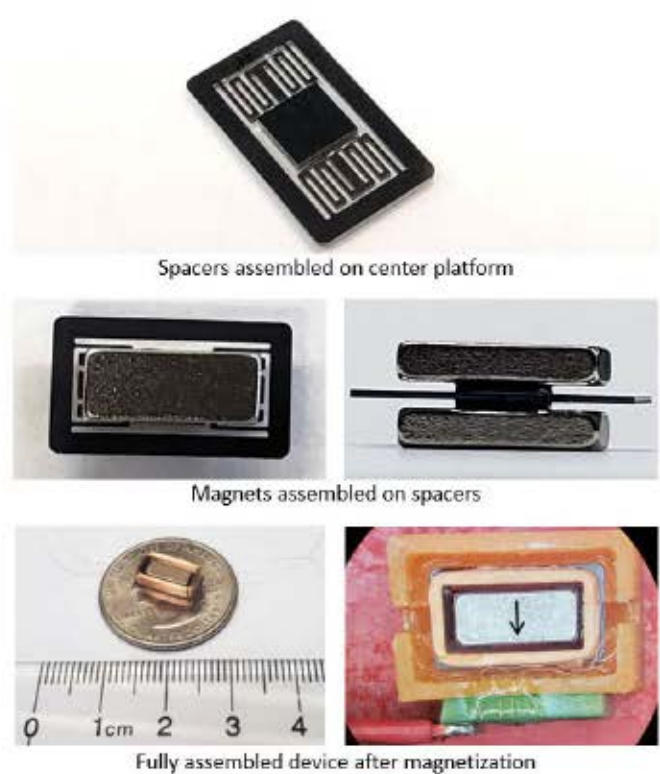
Photographs of the assembled components and a fully assembled EWPT receiver prototype.
